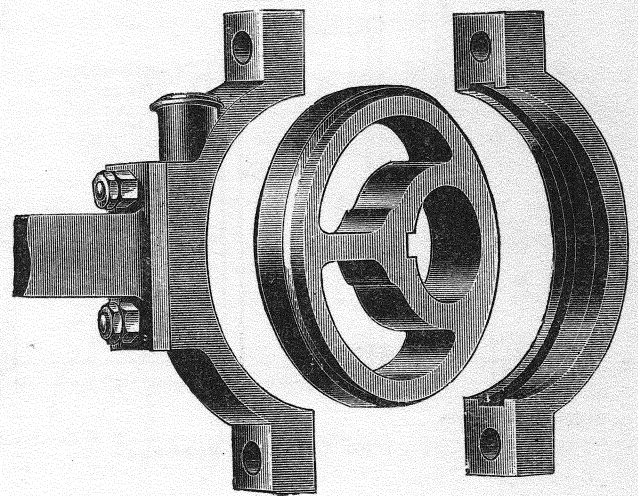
represents an eccentric for working the slide valve of a locomotive engine. The eccentric sheave is made in two parts, A and B, jointed in a plane containing the axis of the shaft and at right angles to a plane passing through this axis and the centre of the sheave. The smaller piece A is made of wrought iron, and the larger one B, of close grained cast iron. They are held together by two cotter bolts, and the whole sheave is fixed to the crank shaft by a small key and two set screws, secured by lock nuts. The necessity for making the sheave in two parts will be understood on referring to the crank shaft, Fig. 2, Plate XXV. The distance between the axes of the shaft and the sheave is the throw of the eccentric, and half the travel of the valve which it actuates.
